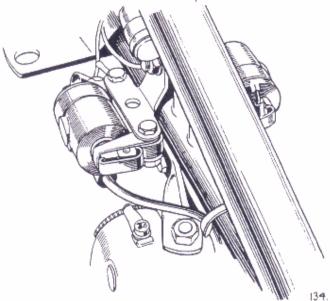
A.C. ignition colls fitted on machine Both sets of contact breaker contacts must be kept clean and adjusted correctly to the gap setting
